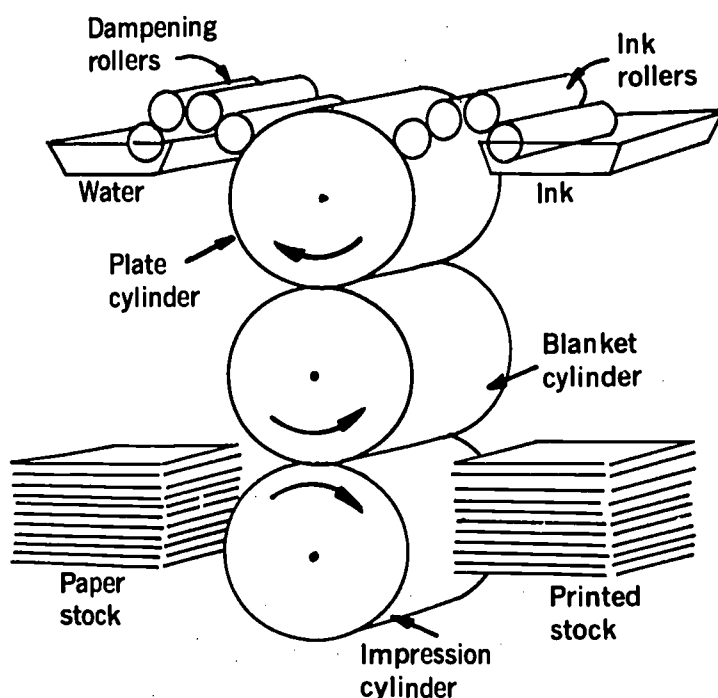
This illustration shows how planographic printing is done. Notice how all the parts work together.
